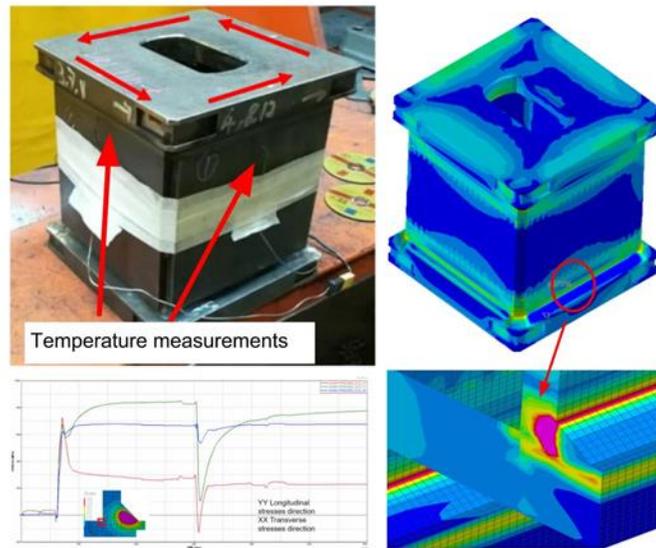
Weld induced residual stresses in welded structures using efficient computational weld mechanics concepts.
